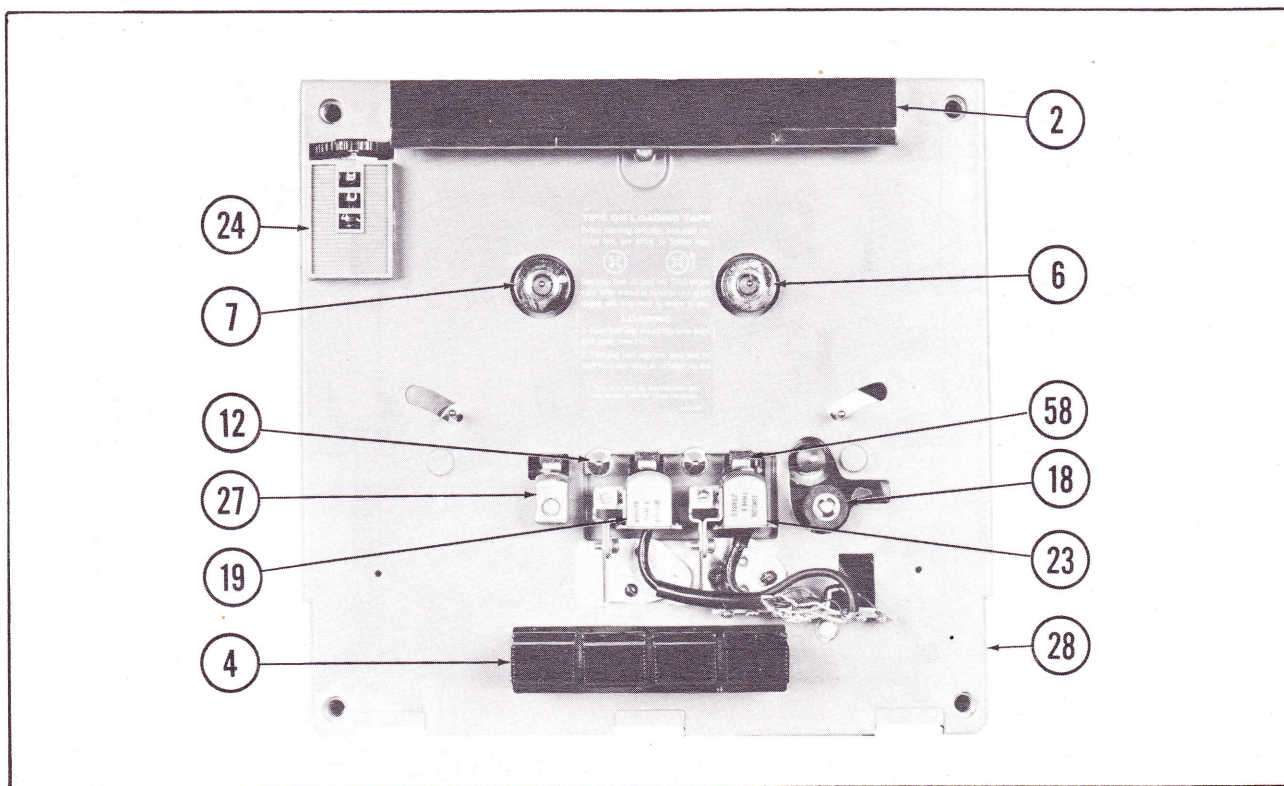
TOP VIEW OF MECHANISM WITH TOP DRESS PLATE REMOVED.
